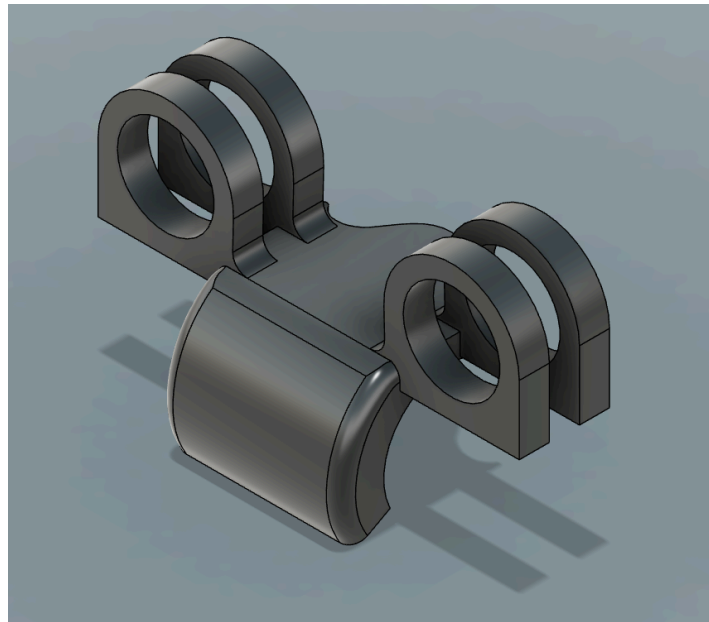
Simplified faceplate redesign. Removed all attachments and simplified the geometry considerably to allow for easier simulating.
